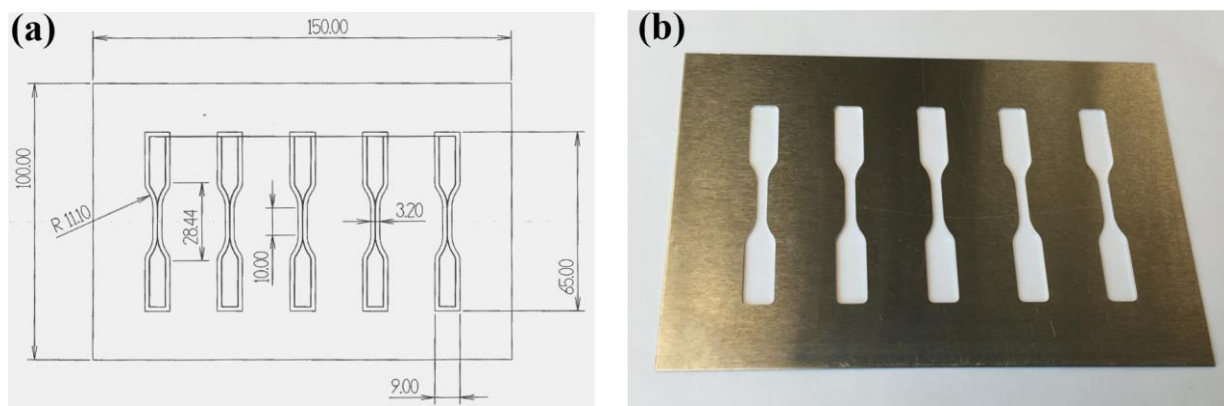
Dog bone shaped molds for preparing EVA samples. (a) Dimensions of the molds; (b) Molds for hot pressing polyolefin.
